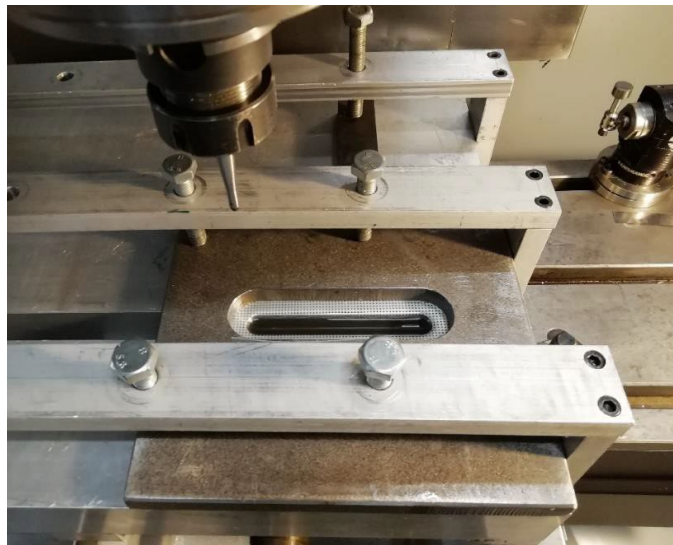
Device for incremental forming mounted in the table of a numerically controlled Haas TM-1P vertical milling machine.
